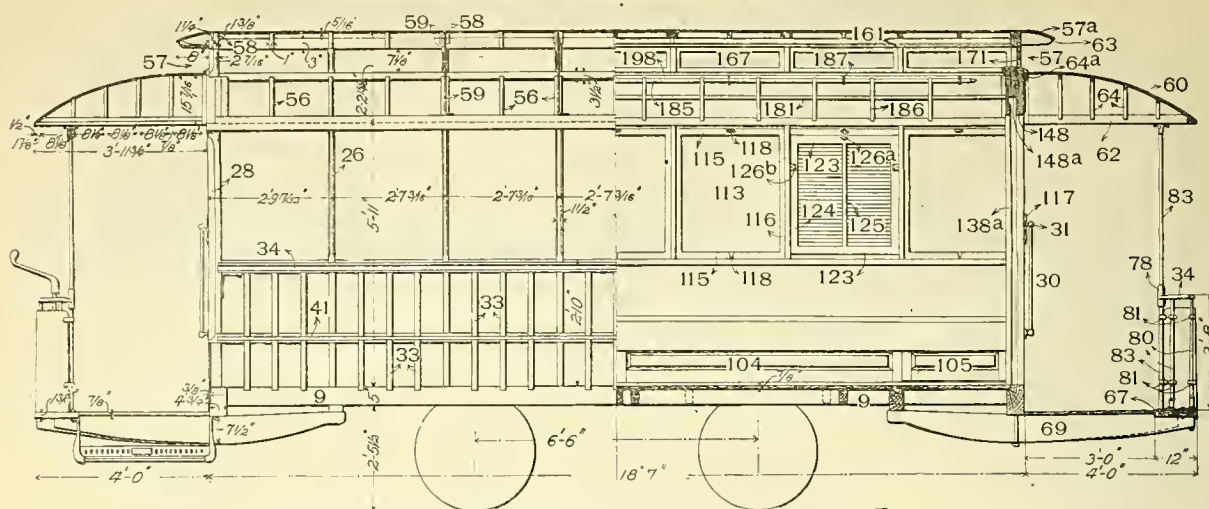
Half Side Elevation of Framing and Half Longitudinal Section.
